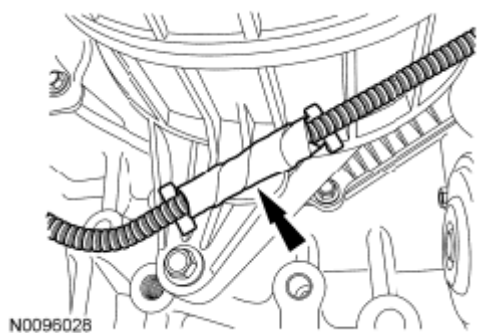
Locating A/C Compressor Wiring Harness Pin-Type Retainer
